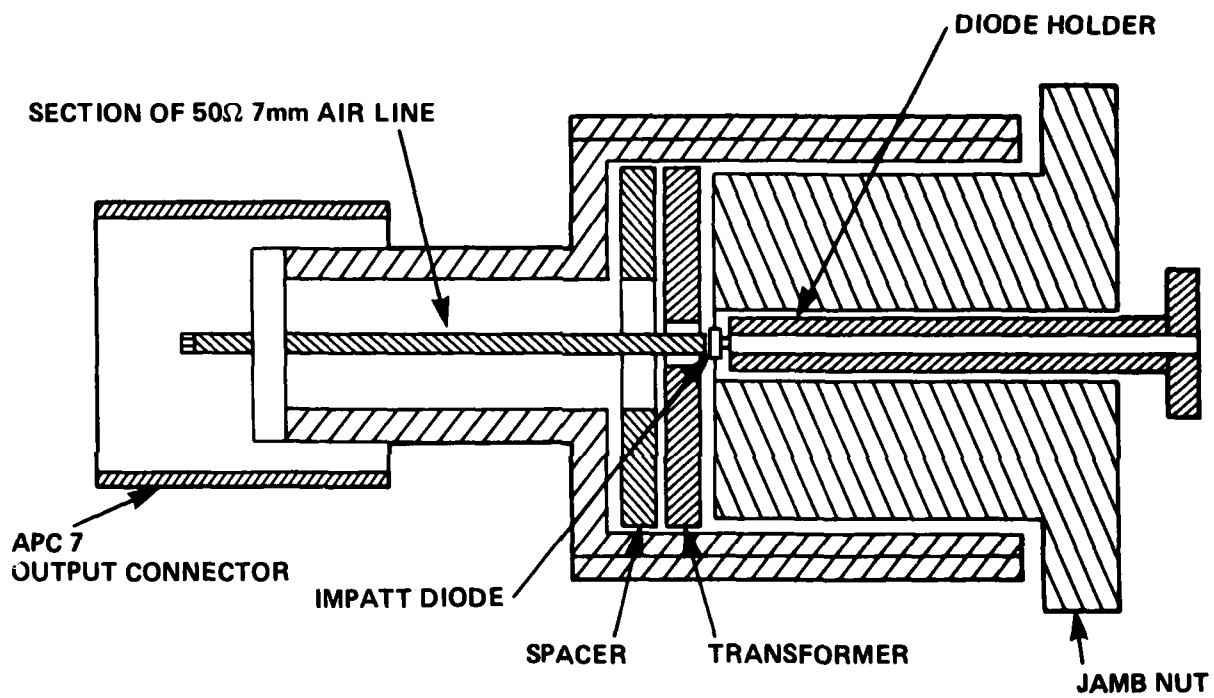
COAXIAL CAVITY IMPATT TEST FIXTURE
